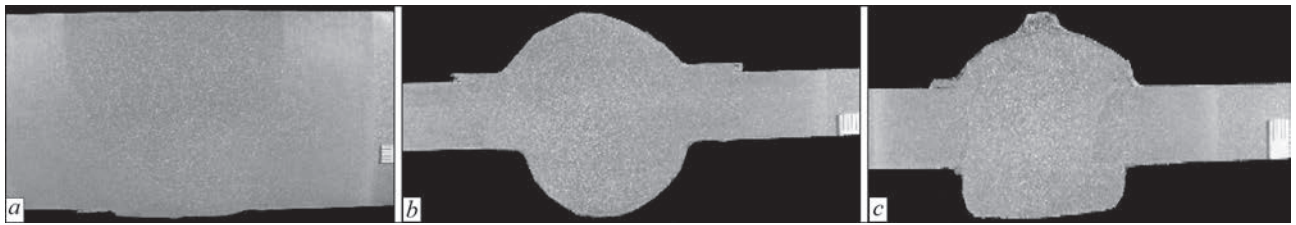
Macrostructure of welded butt joint in the zone of head (a), web (b) and flange (c) of rails
